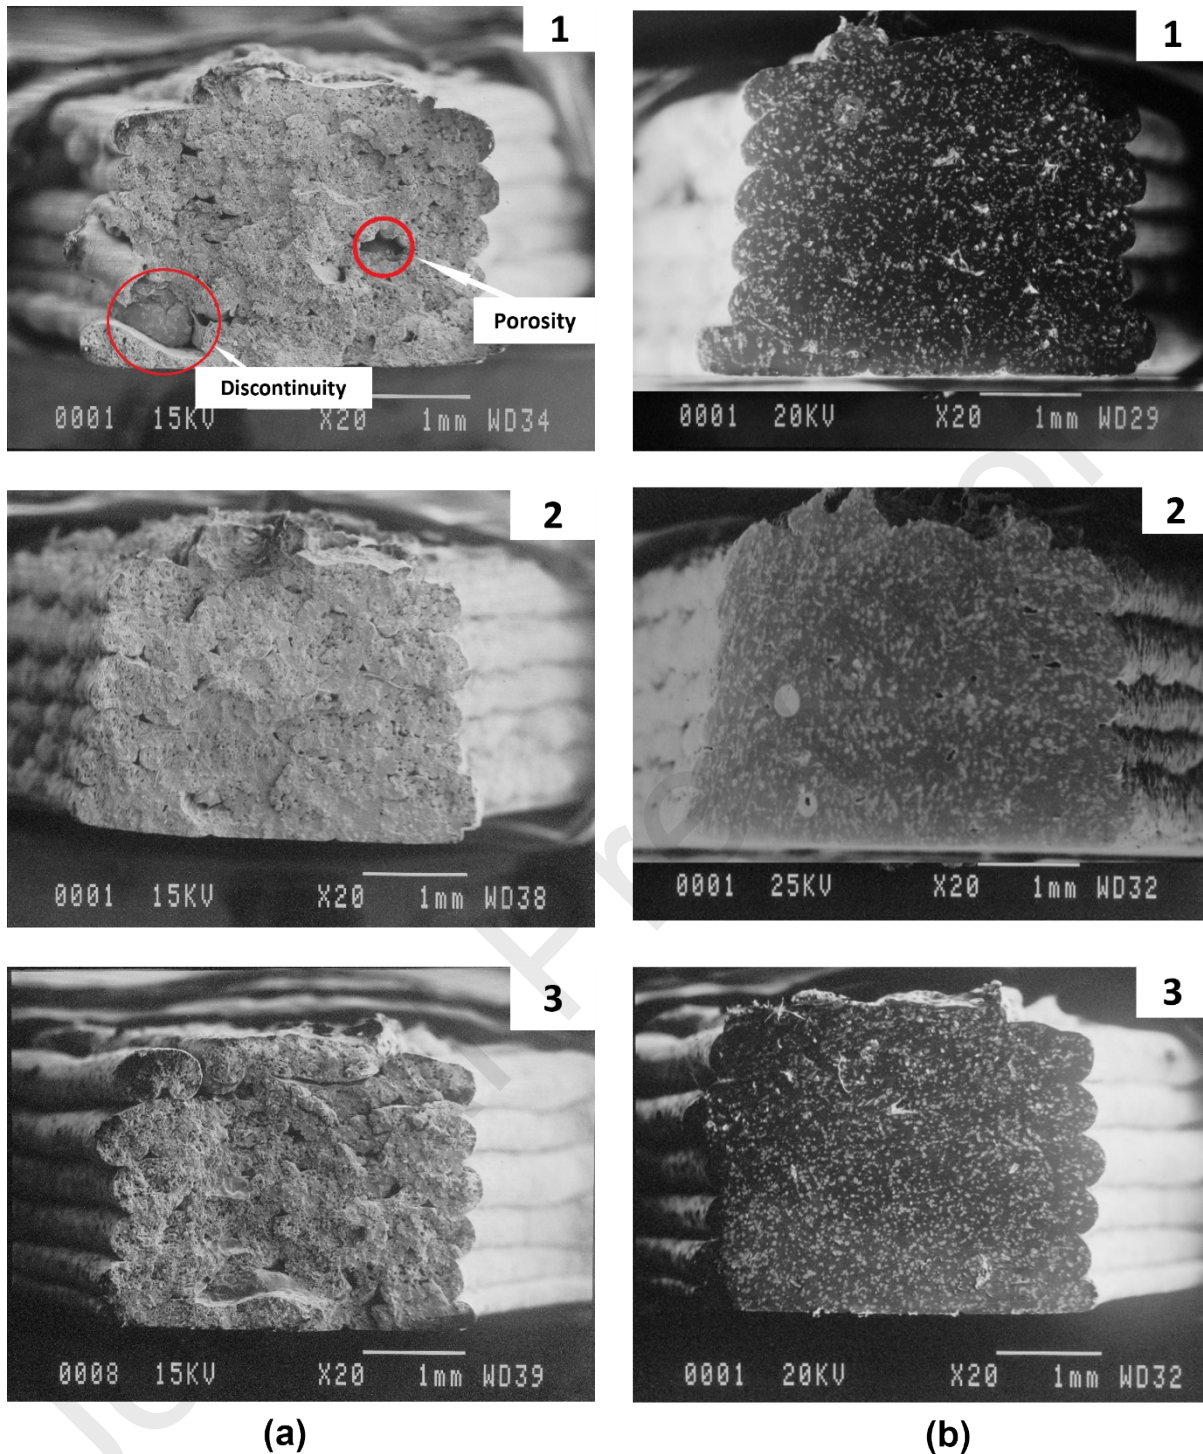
(a) Fracture sections of printed samples with 0° angle. 1) sample 2, printed without magnetic field, 2) sample 5, printed with a magnet under the sample area and 3) sample 8, printed with a magnet around the print area. (b) Prepared fracture sections of printed samples with 0° angle. 1) sample 2, printed without magnetic field, 2) sample 5, printed with a magnet under the sample location and 3) sample 8, printed with a magnet around the print location
